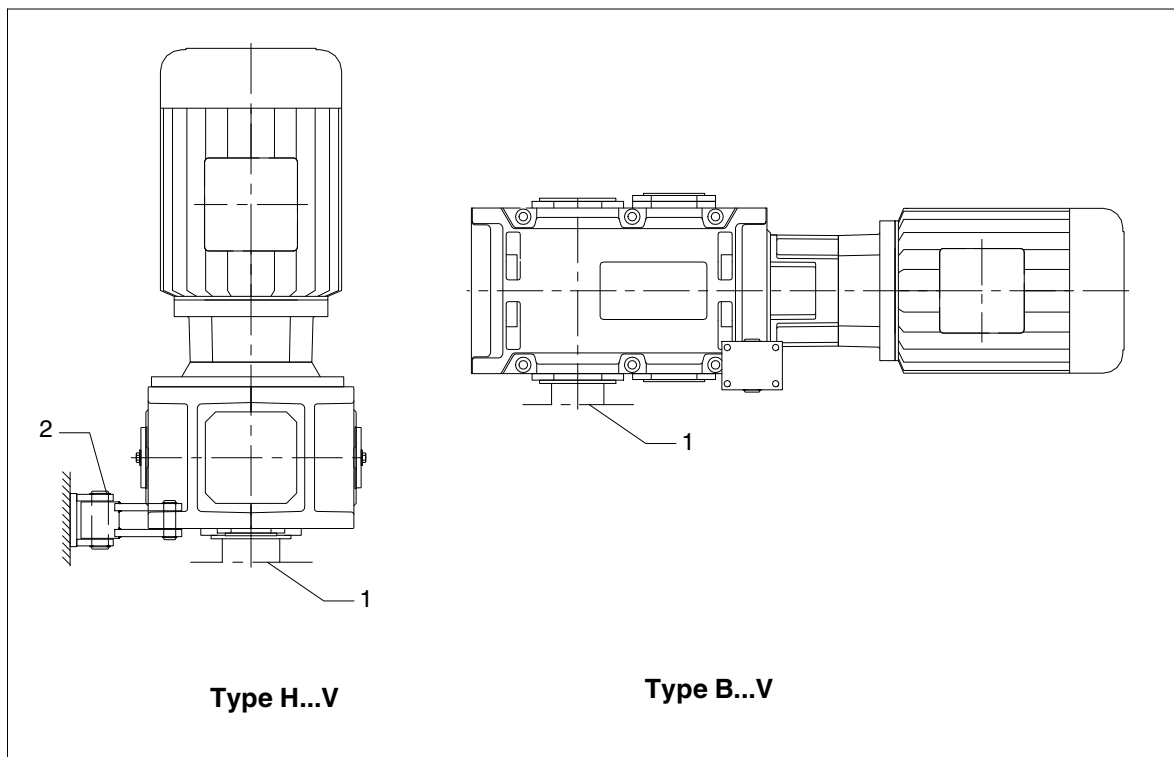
Torque arm for gear-unit housing of types H..V and B..V
